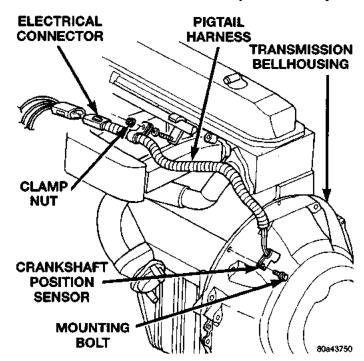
Crankshaft Position Sensor—4.0L 6-Cyl. Engine—Auto. Trans.
